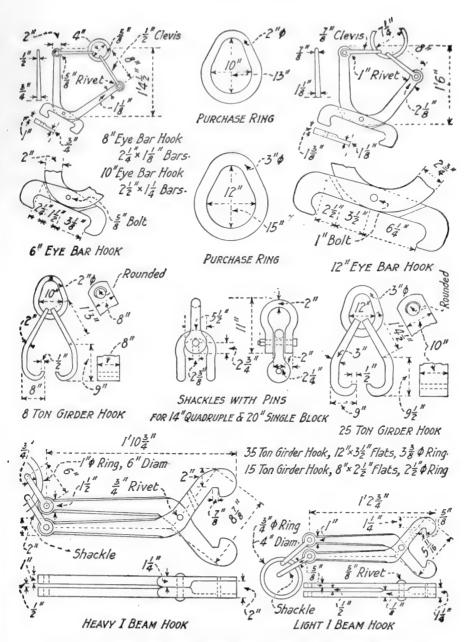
TOOLS FOR STEEL ERECTION. AMERICAN BRIDGE COMPANY.
